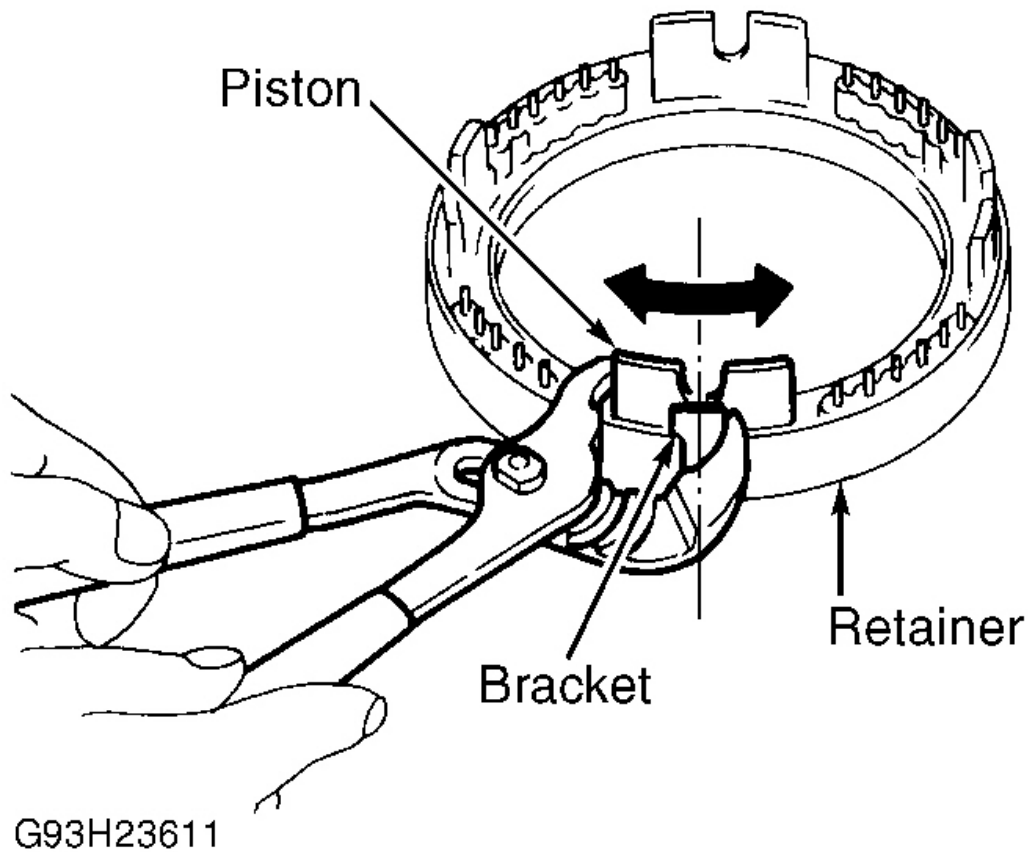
Aligning Low-Reverse Brake Piston With Spring Retainer
